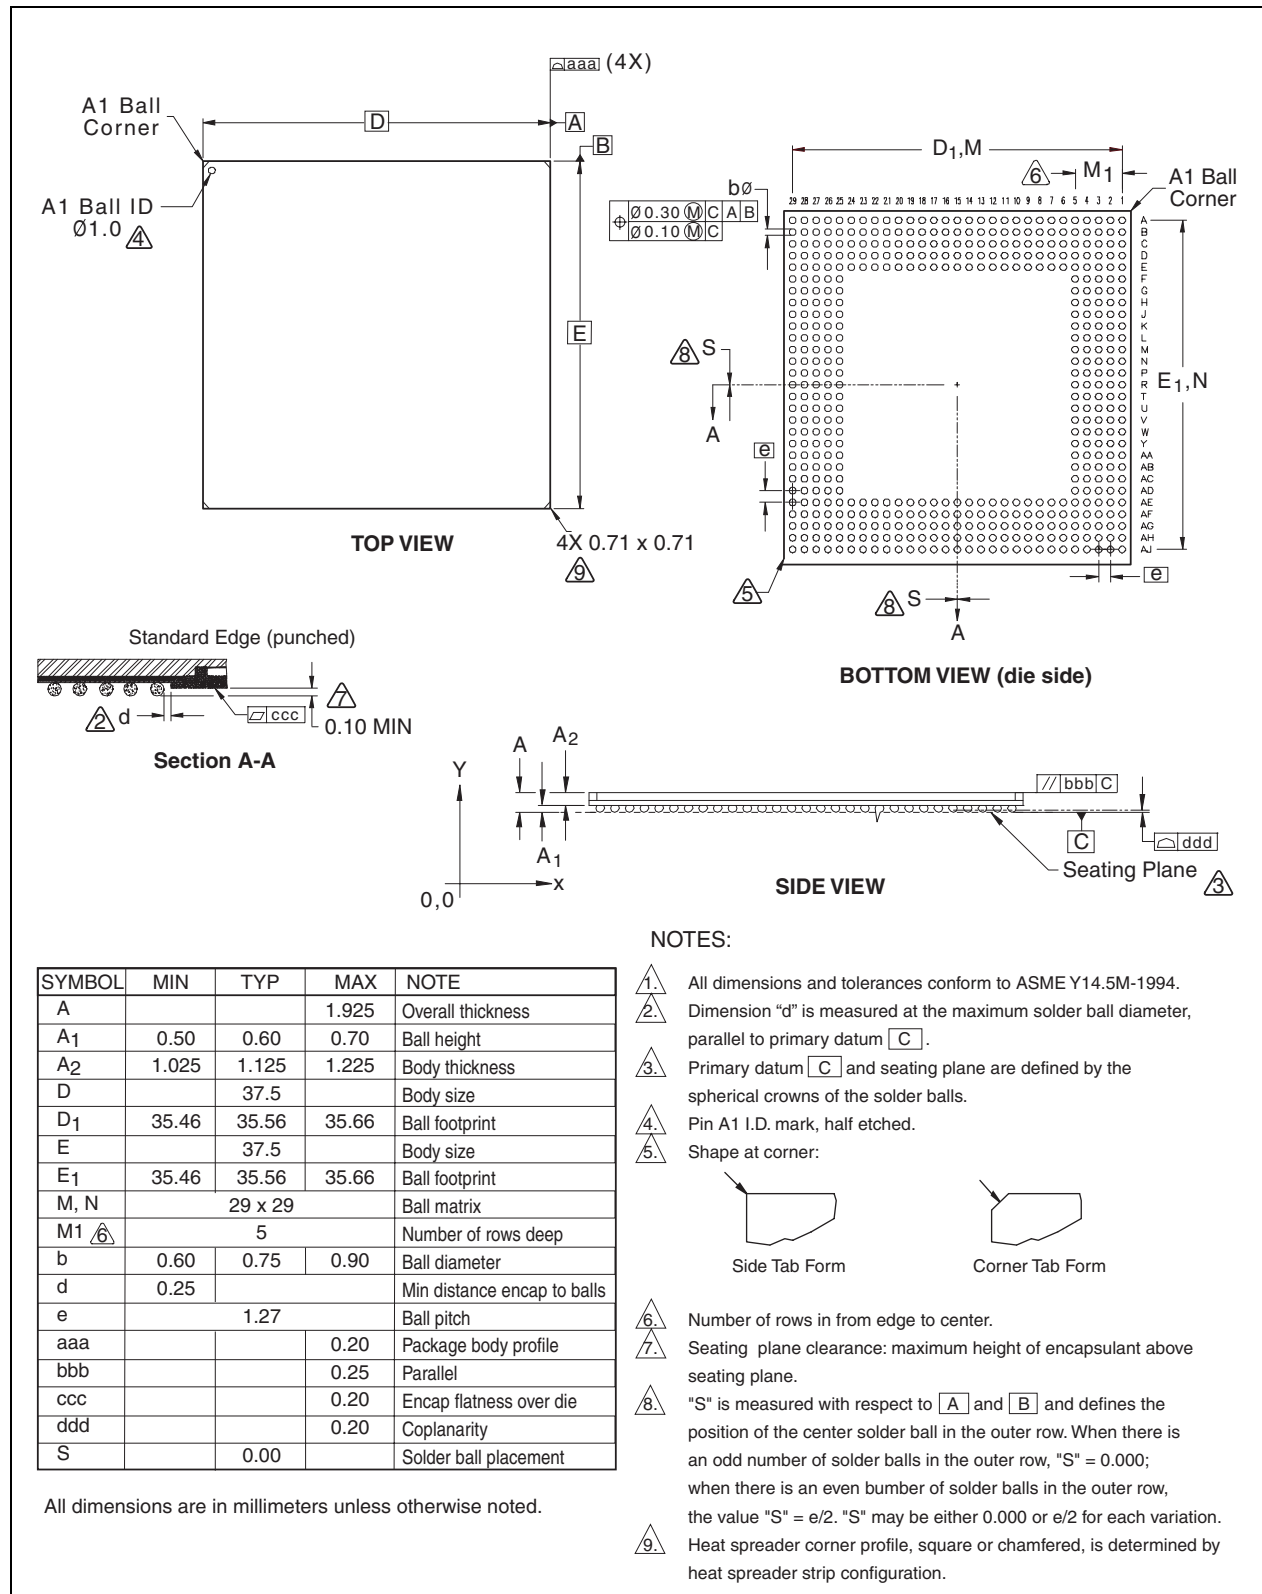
Package Drawing for 480-Pin TBGA (UG)
